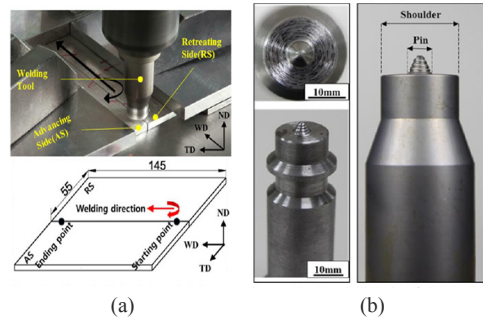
(a) Schematic of friction stir welding and (b) tool shape
